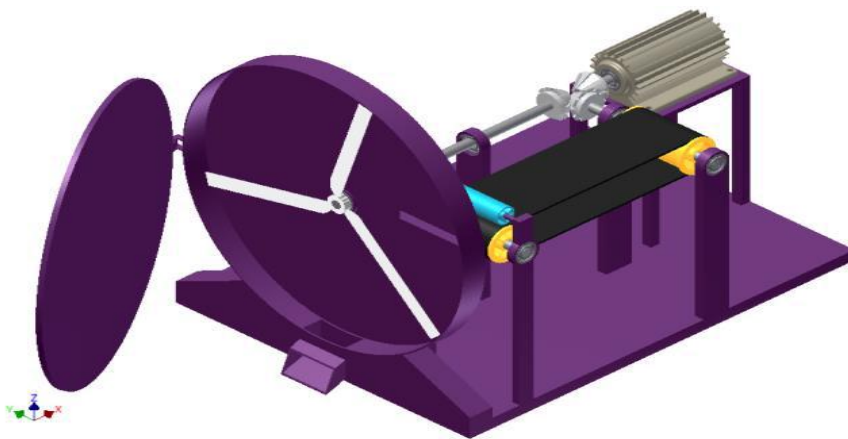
Isometric view of the fluted pumpkin leave cutter (with cutting unit open)
